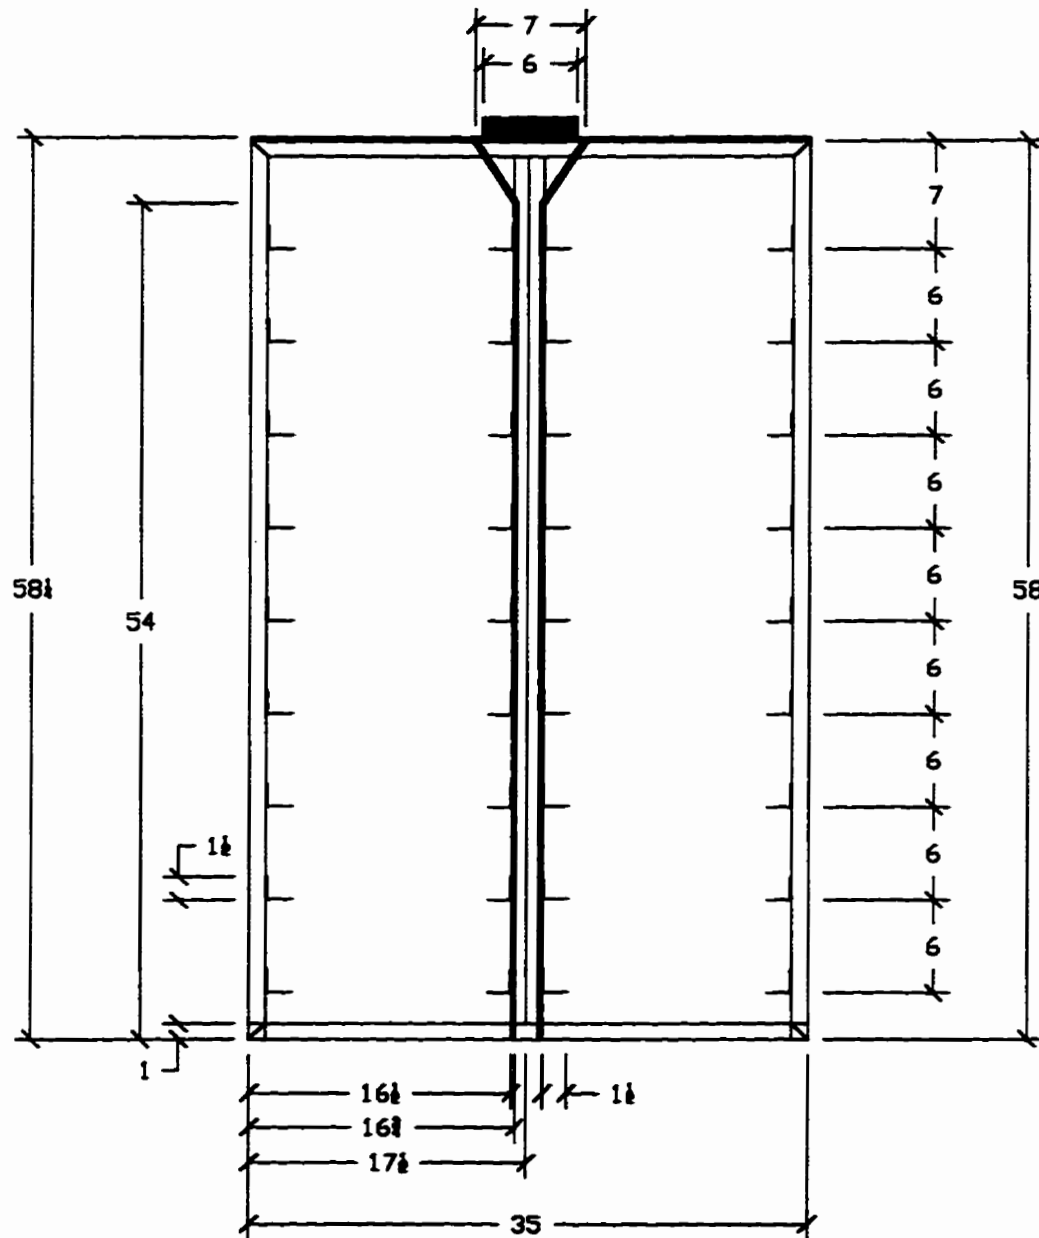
Front view of the shelving unit with Imperial measurements (inches).
